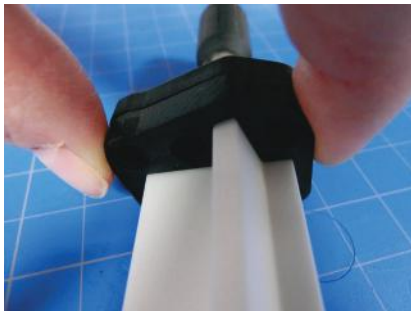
3D printed manifold connections fit with the cooling channel flange.
